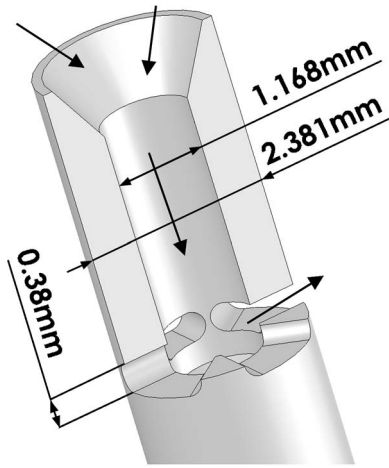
Cutaway view of the rotary shaft pump (RSP) impeller. Shown is the radial four-blade impeller. Arrows indicate flow direction.
